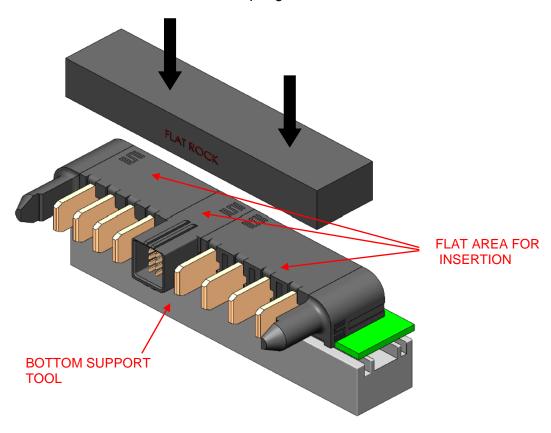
Flat Rock & Bottom Support Tool Application to Seat Connector
